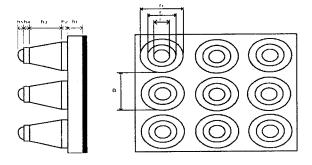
Side view and floor plan of the new proposed EM wave absorber.
